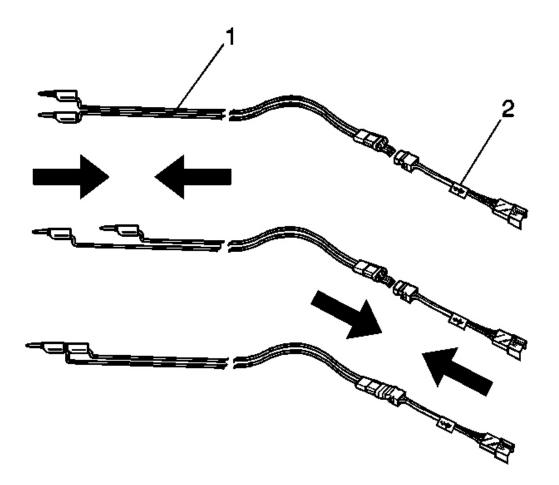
Identifying SIR Deployment Harness & Adapter Courtesy of GENERAL MOTORS CORP.
